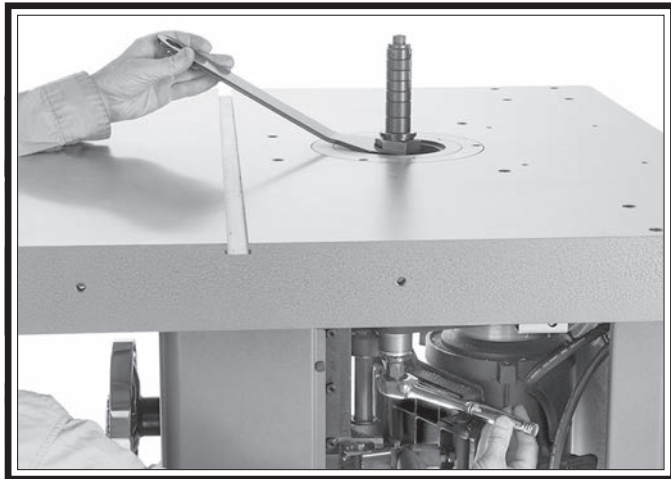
Tightening drawbar nut (guard/fence assembly removed for clarity).
